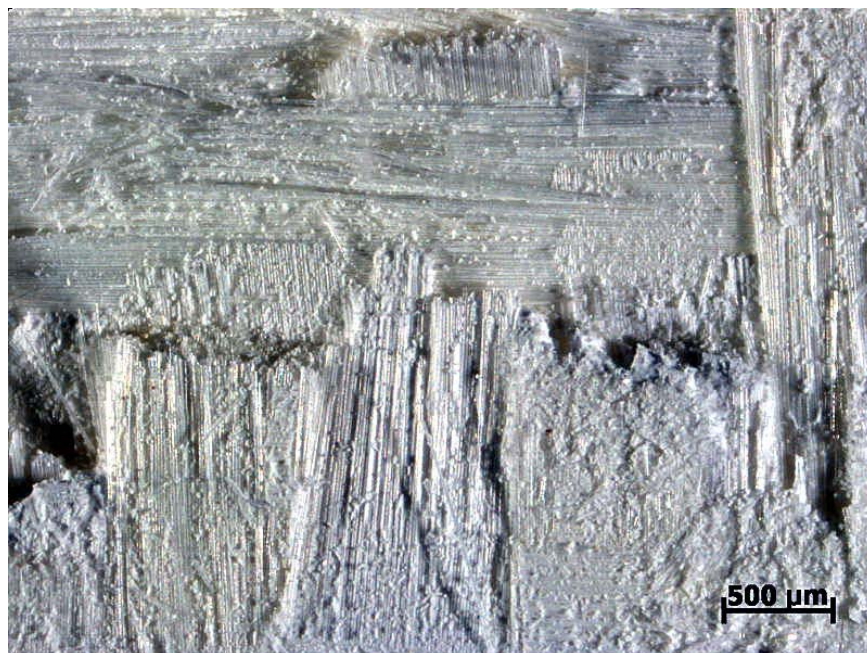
Close-up of the fracture surface of piece B of the N720/A specimen tested in creep at -4.0 MPa at 1200°C in steam for 100 h. This specimen was unloaded, but remained at 1200°C for the duration of the test.
